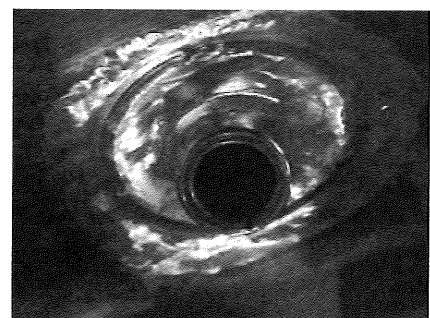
Appearance of seal welding over whole J-weld with penetrated PWSCC
